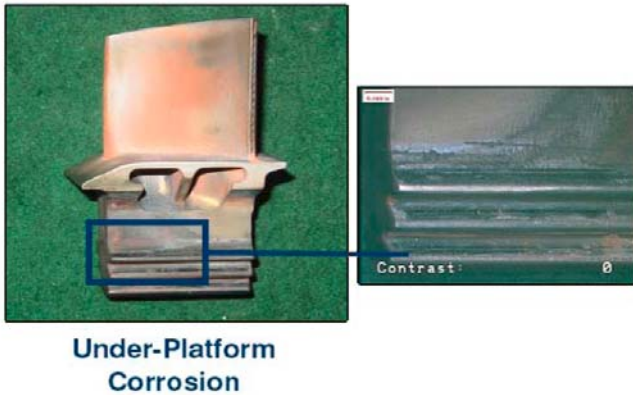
Type II Hot Corrosion Attack to Turbine Blade Shank
